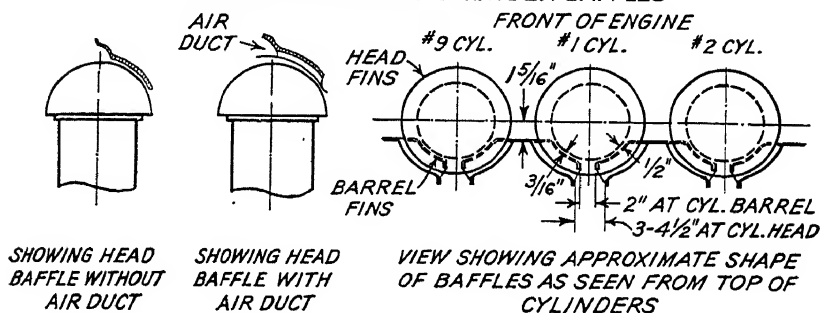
Cylinder head and intercylinder baffles used on Wright C9GB engine. (Campbell, *S.A.E. Trans.* vol. 33, 1938.)
